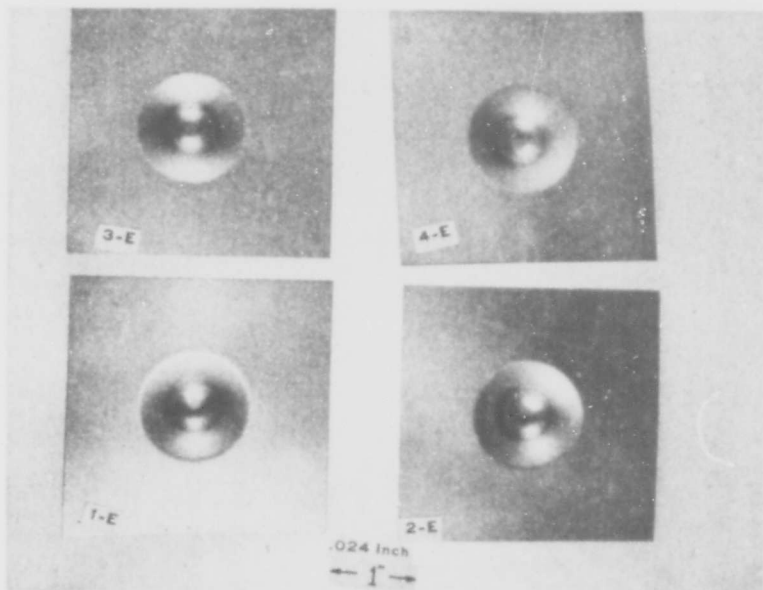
Olsen cup test specimens of duplex annealed 0.032 and 0.024-inch Cb-752 sheet (Note brittle failure of specimen 4E of the 0.032-inch thick sheet).
